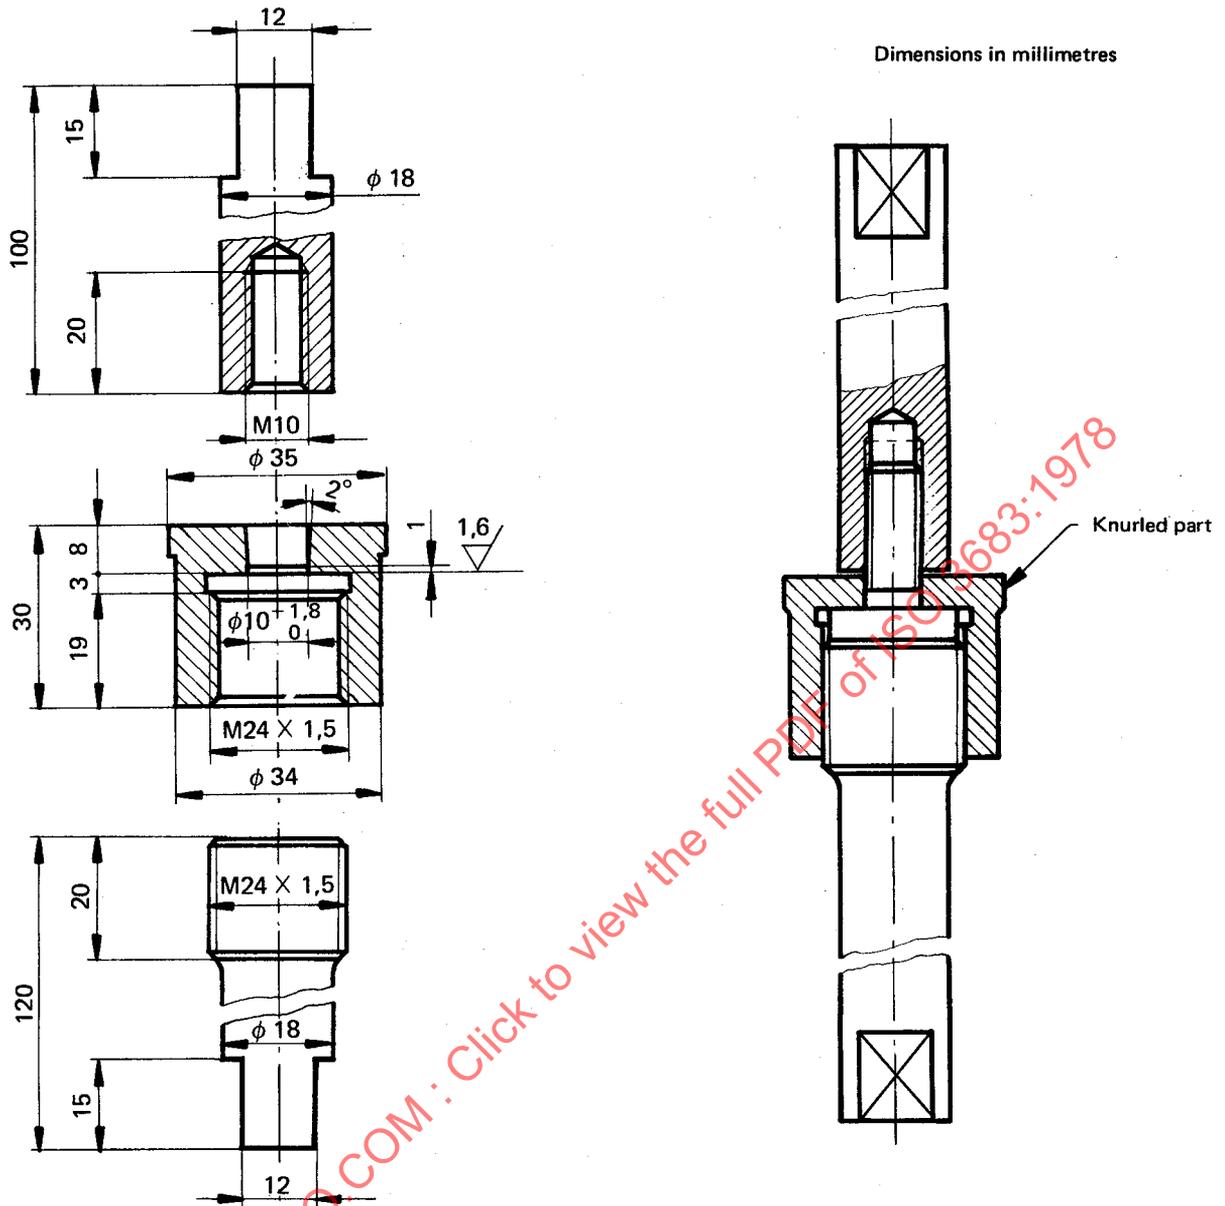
Fixture for tensile loading, Type II test pieces
